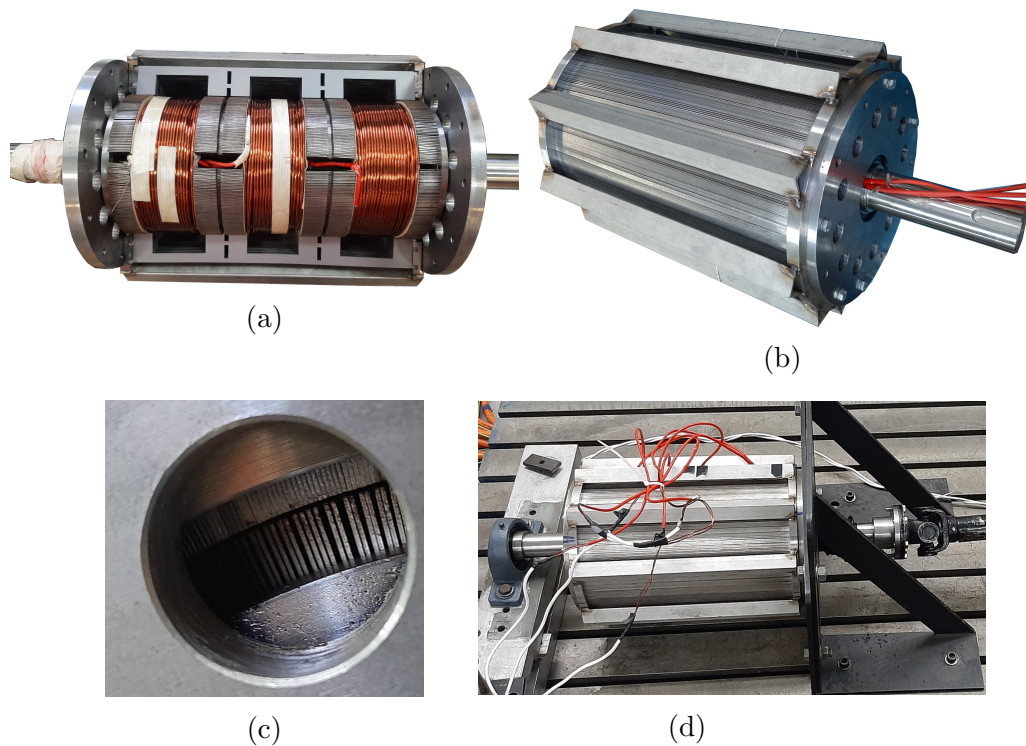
Complete assembly of the RT (a) Rotor in stator half, (b) Full assembly, (c) Inspection of the air gap, (d) RT mounted in testing
